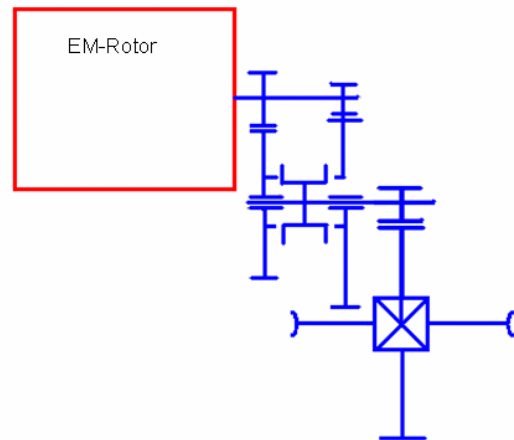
Gearbox pattern of a two speed spur gearbox with parallel layout
